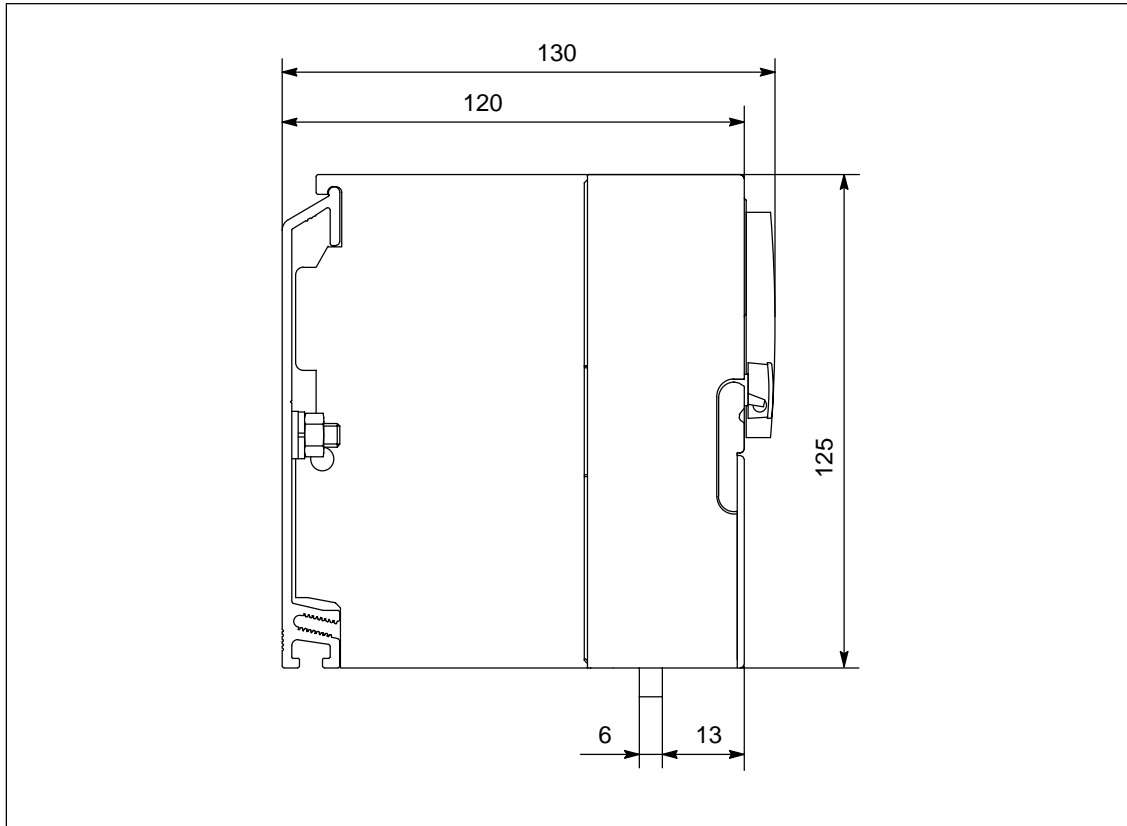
Dimension Drawing of the Power Supply Module PS 307; 5 A with CPUs 313/314/315/315-2 DP. Side View
